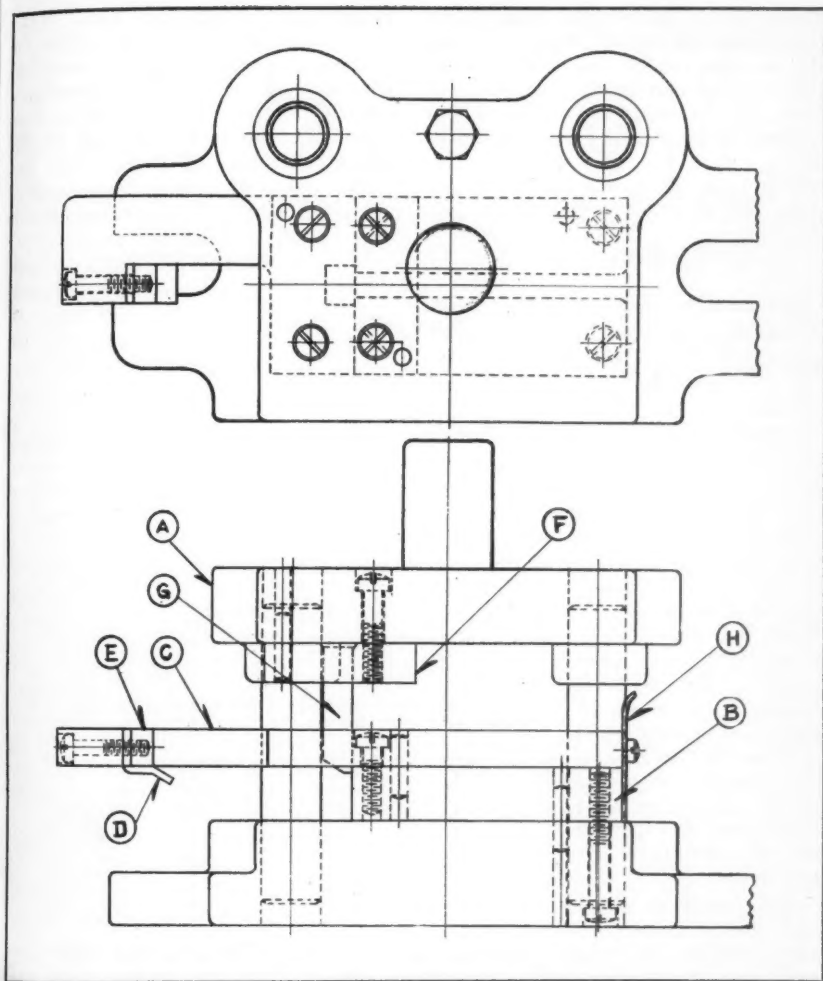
Design of blanking die for cutting off the copper strip shown in Fig. 4
